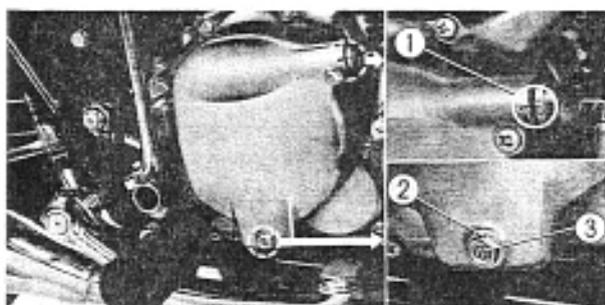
① Matching mark ② Lock nut ③ Clutch adjuster
